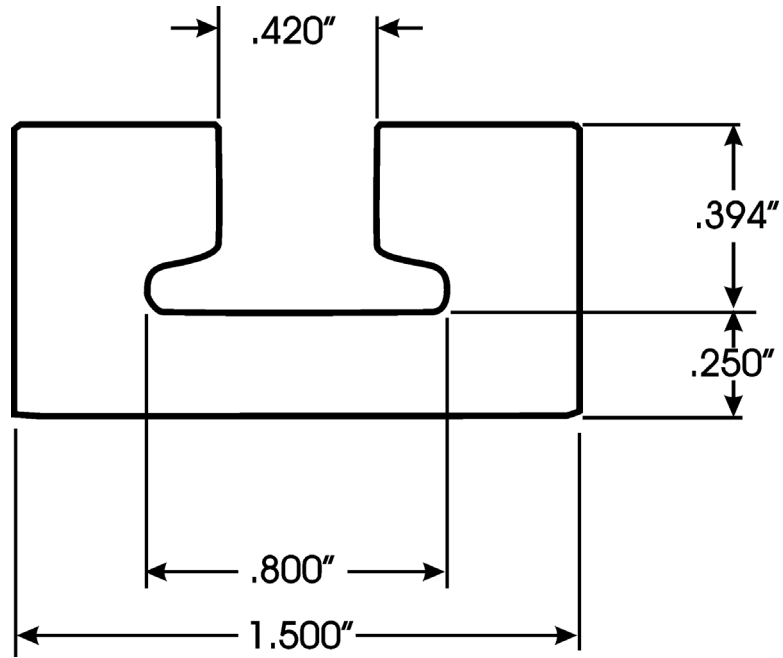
Type "S" Track, HSLA 80 Foundation Track HSLA 80 Steel (Weight 2.41 LB/LF)
